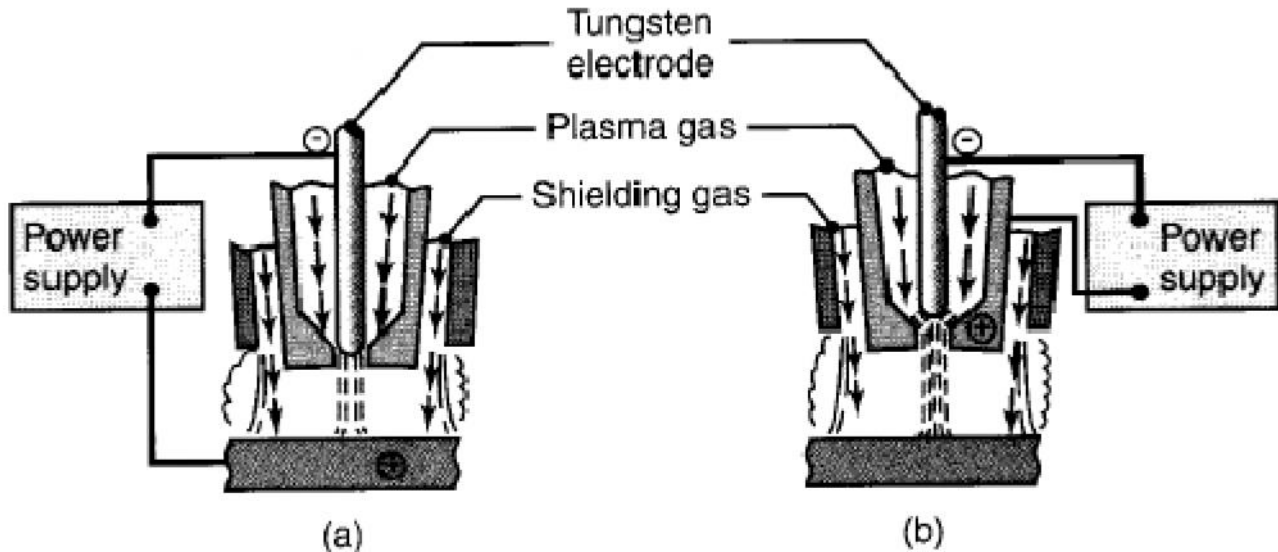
FIGURE Two types of plasma-arc welding processes: (a) transferred and (b) non transferred. Deep and narrow welds can be made by these processes at high welding speeds.
